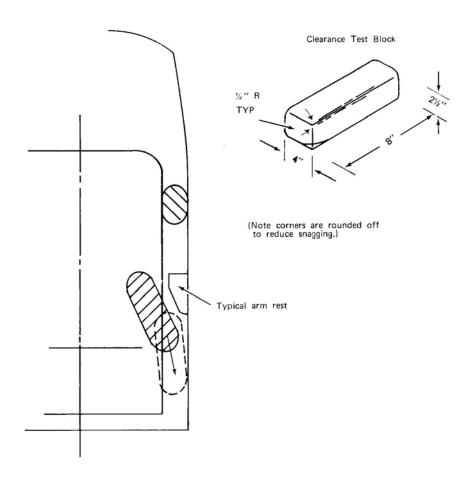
USE OF CLEARANCE TEST BLOCK TO DETERMINE HAND/ARM ACCESS
